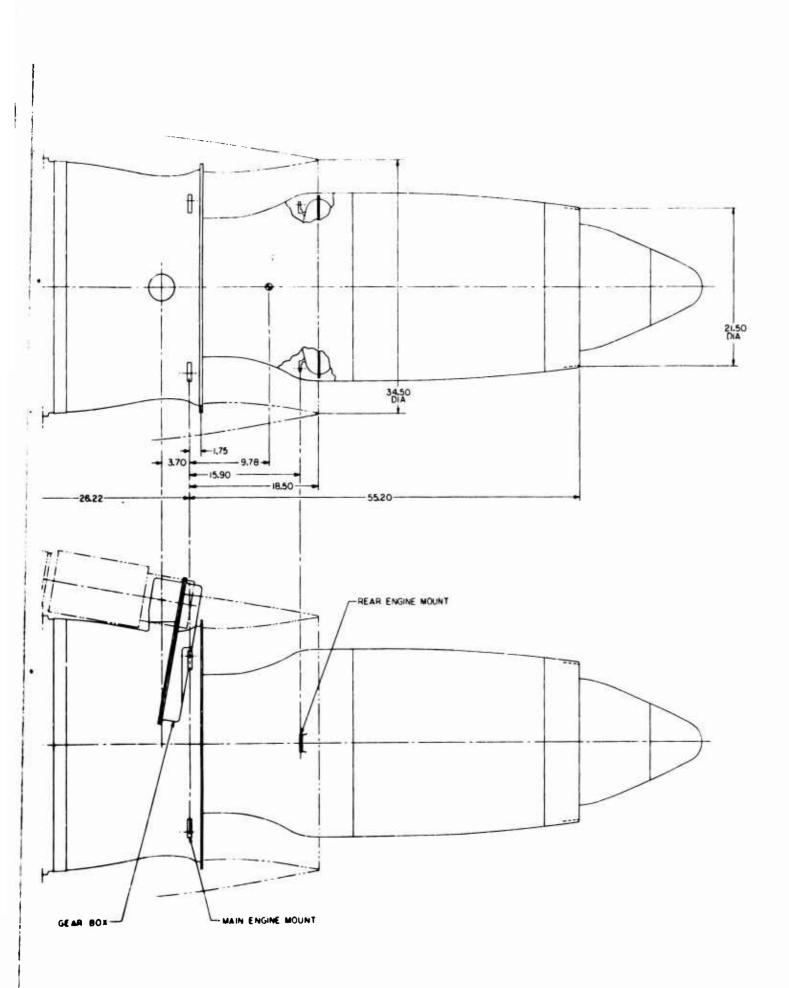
Preliminary Installation Drawing, Ungeared Engine.
